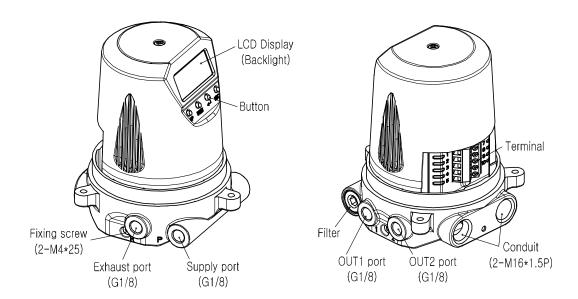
TMP-3000 Exterior Parts and Description (Base Cover Removed)
